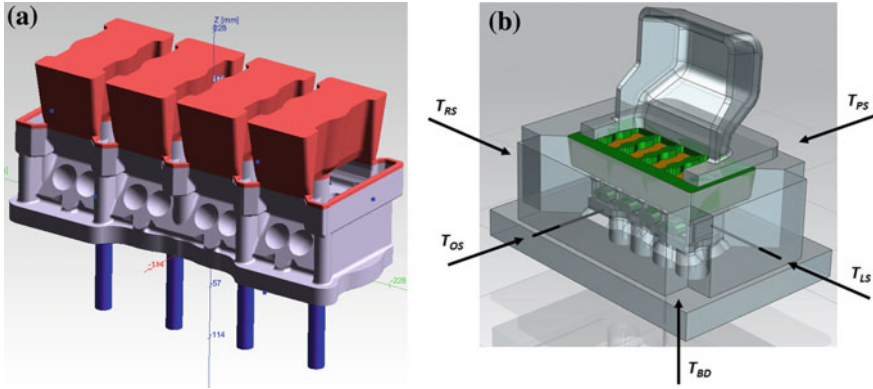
CAD assemblies of a engine head casting, feeder, cooling channels and b pouring cup, die parts, cores, thermocouples T_{BD} , T_{OS} , T_{PS} , T_{LS} , T_{RS}
